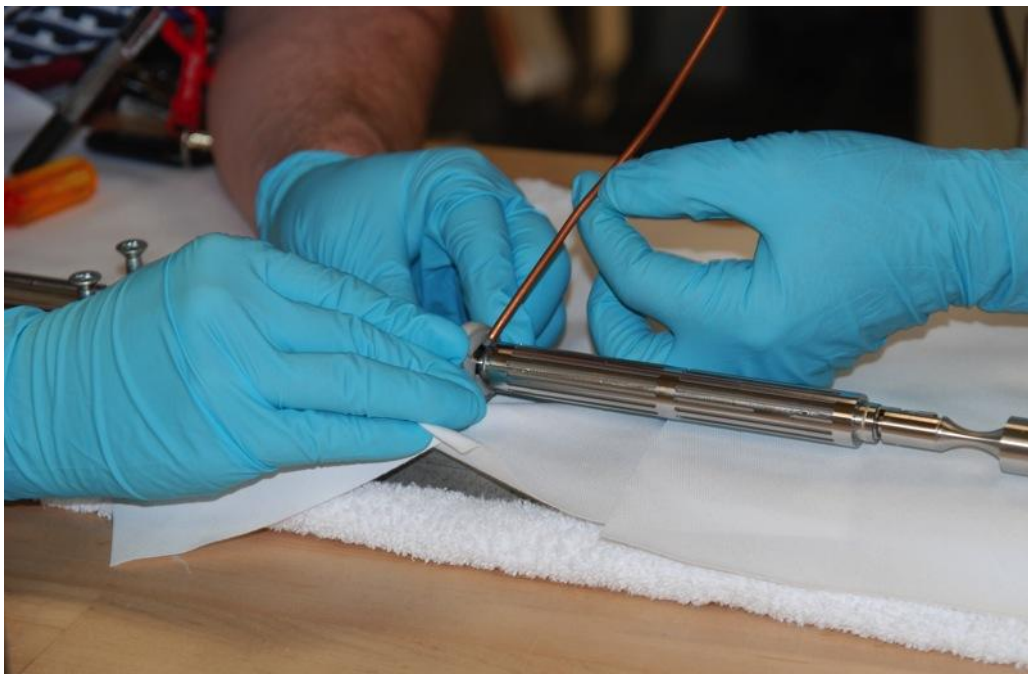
Performing He leak check on a TMIST-1 capsule after electron beam welding.
